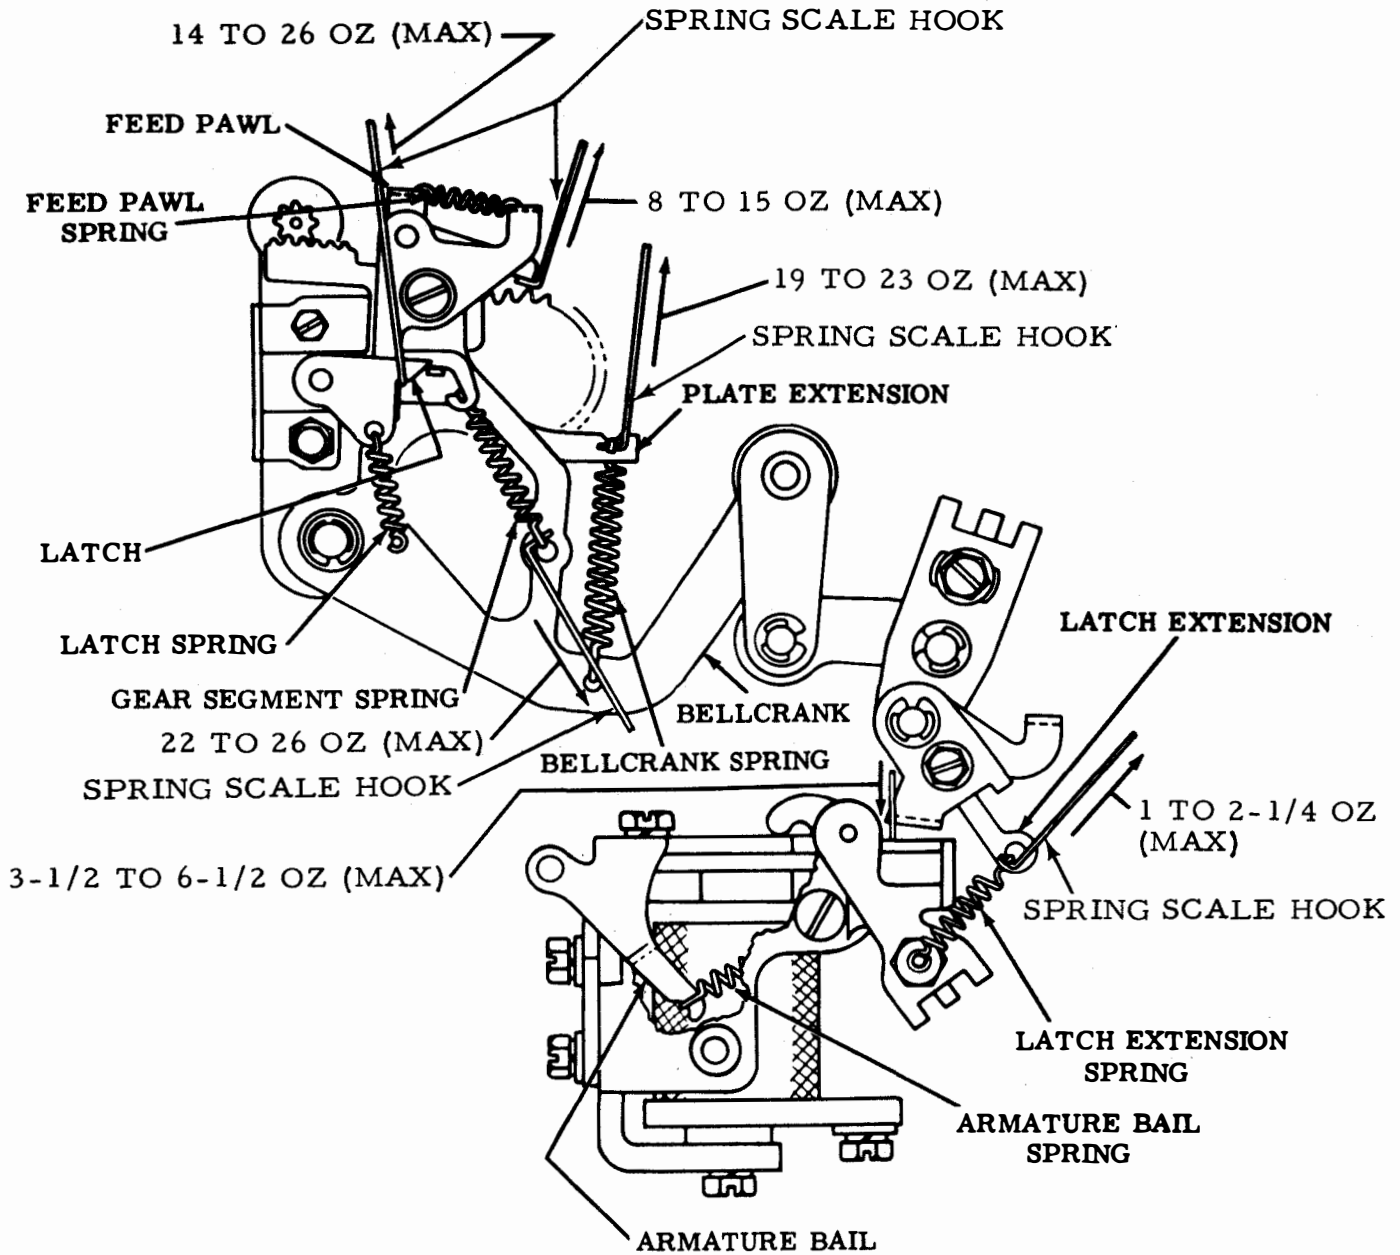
Latch, Feed Pawl, Bellcrank, Gear Segment, Armature Bail, and Latch Extension Springs
